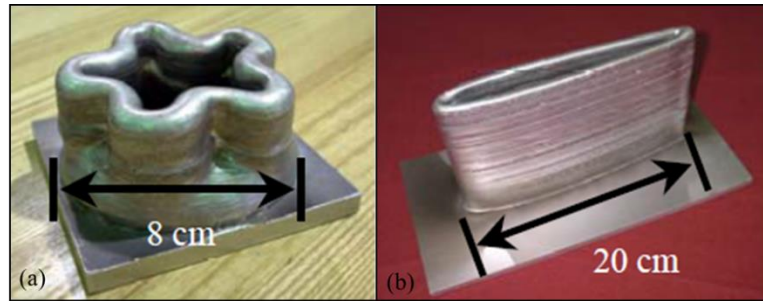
Parts fabricated using wire-based EBM 3D printing technology (a) 3D Star geometry (b) 3D aerofoil geometry [11]
